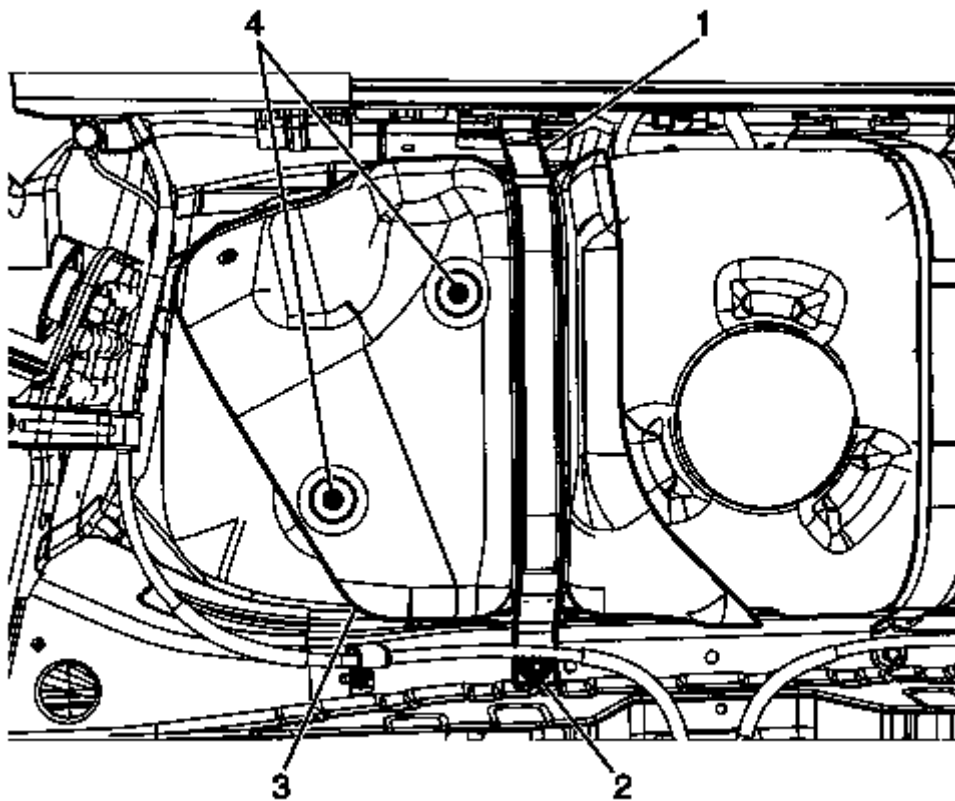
Fuel Tank Strap Retaining Bolt And Band
